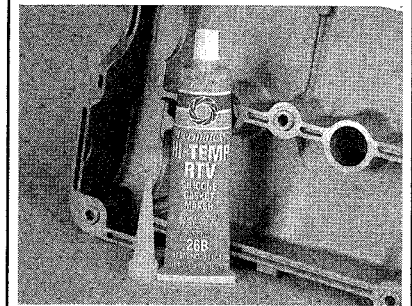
On some engines, RTV is used instead of gasket material to seal components
